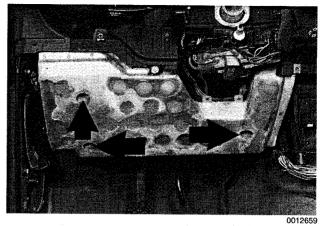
Driver side knee bolster mounting bolts (arrows).
